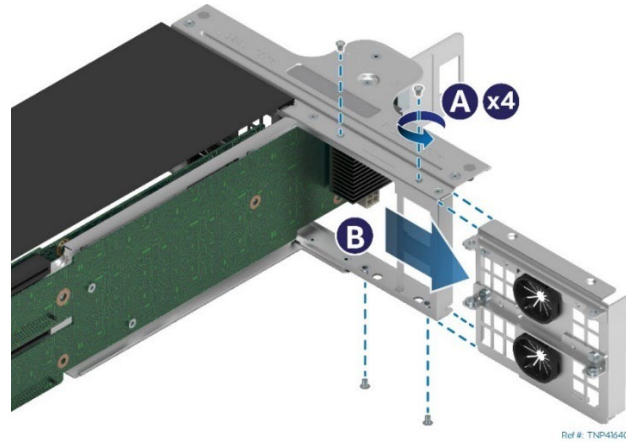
Accelerator Riser Assembly Rear Bracket Removal
